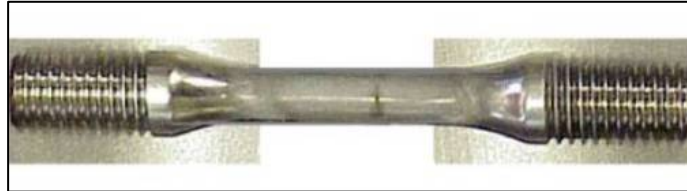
LCF specimen with the braze joint in the centre of the gauge length.
